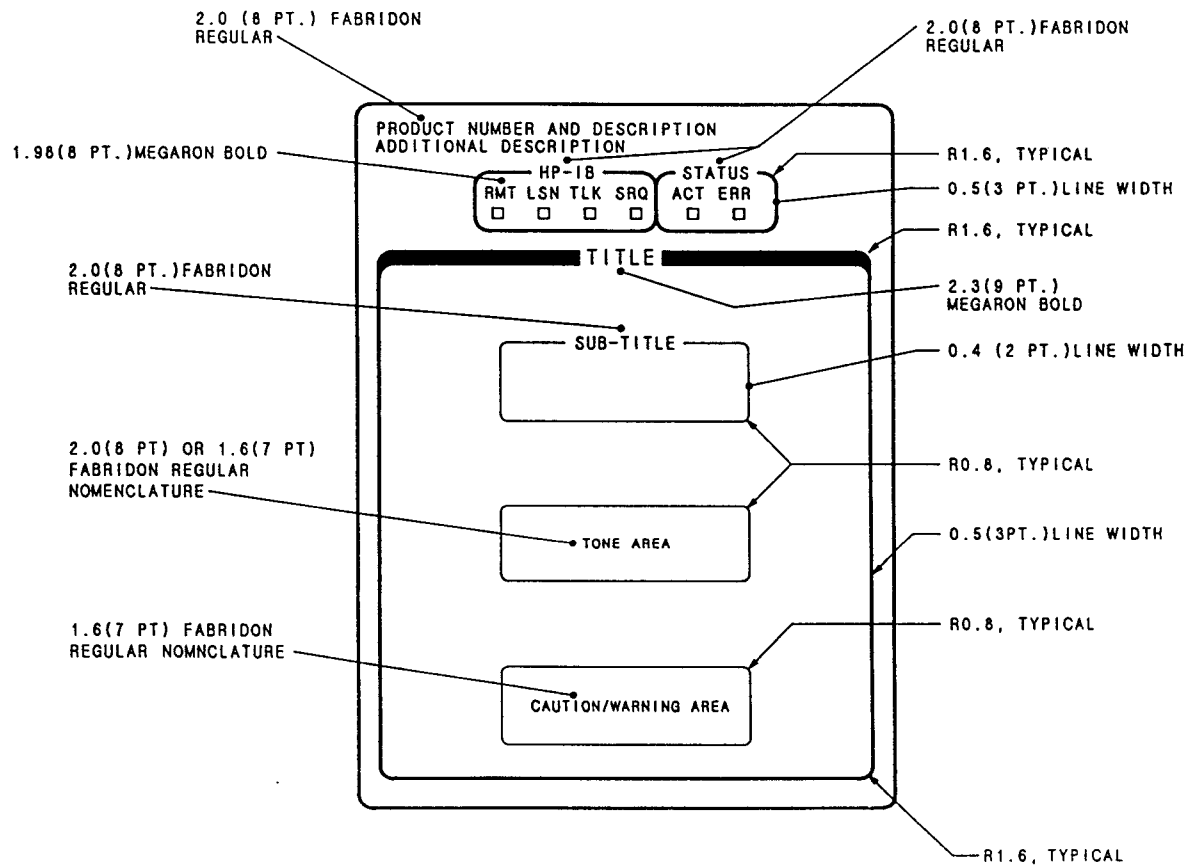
Front Panel Typeface Sizes and Graphics Dimensions
